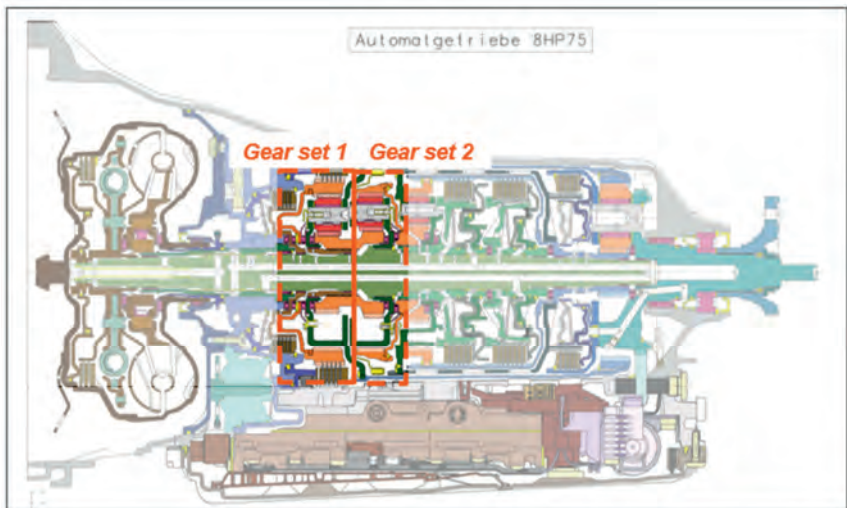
Cross section drawing 8-speed 8HP75 gear assembly, gear sets 1 and 2 highlighted
